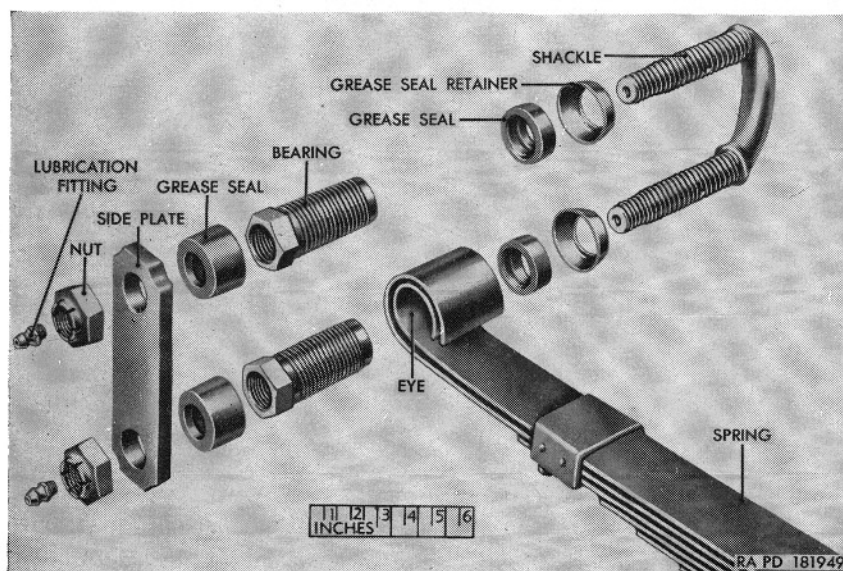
(Added) Spring shackle and spring shackle end of spring M170—exploded view.
